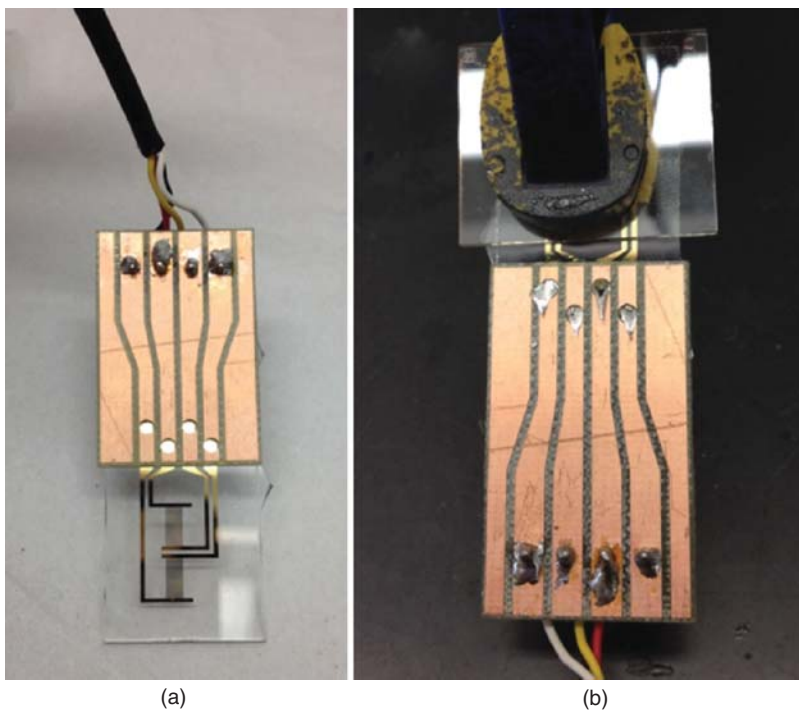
(a) IDA chip glued to circuit board before being soldered together. (b) After being soldered together.
